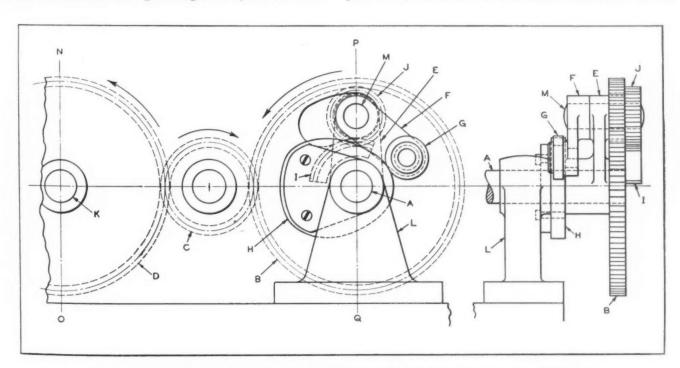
Mechanism for Producing Irregular Rotation of Shaft A and Constant-speed Rotation of Shaft K from the Driving Gear C
